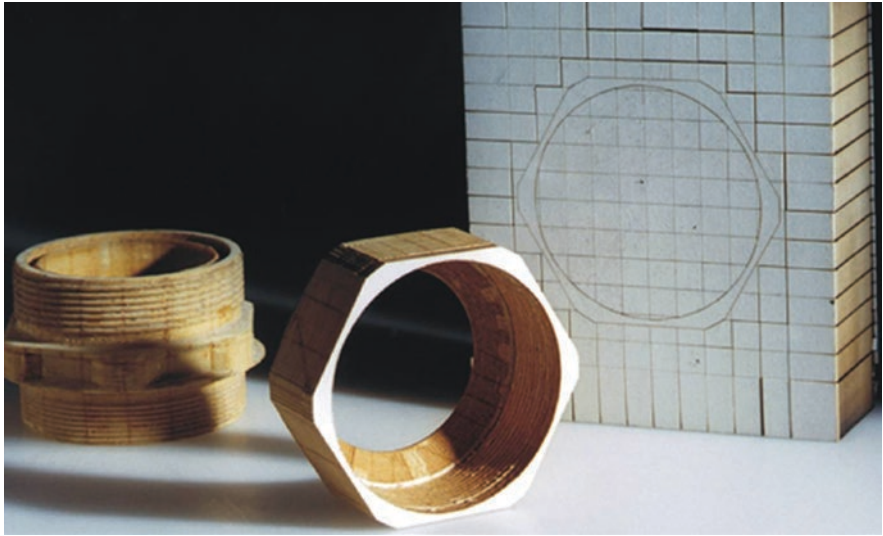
Fabricated samples using Layer Laminate Manufacturing (source: CP GmbH)
